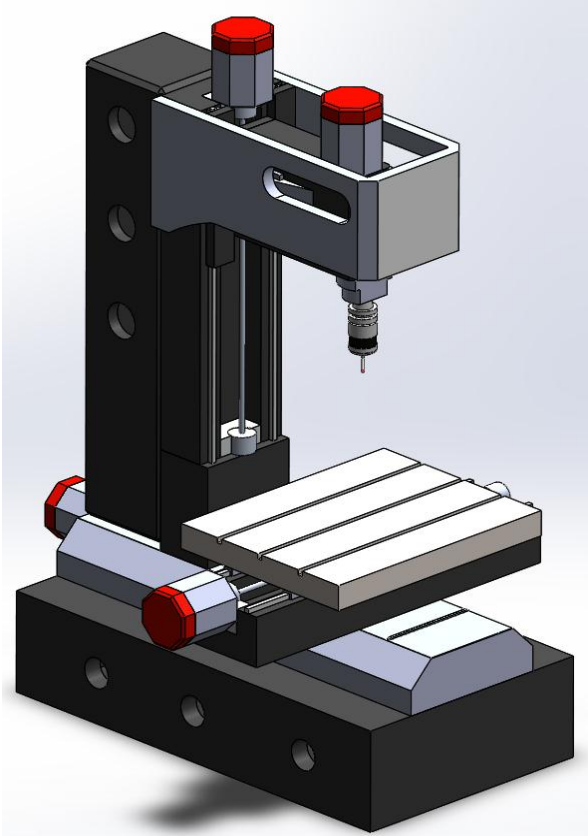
Schematic of a probe mounted 3-axis CNC machine
